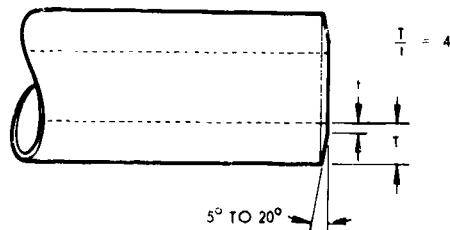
Edge Preparation Required for Welding Thick-Walled Tubing
